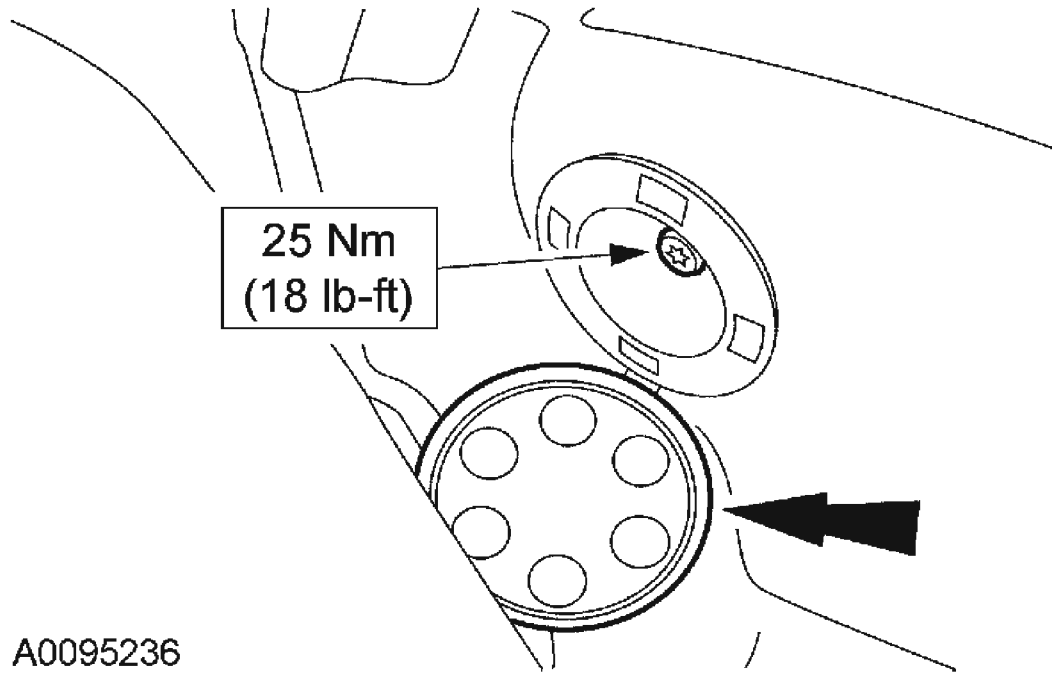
Removing RH And LH In-Vehicle Crossbeam Retaining Bolts
